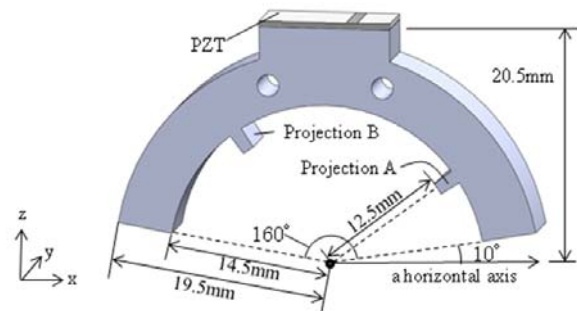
Configuration and dimensions of the half-ring-shaped stator.
